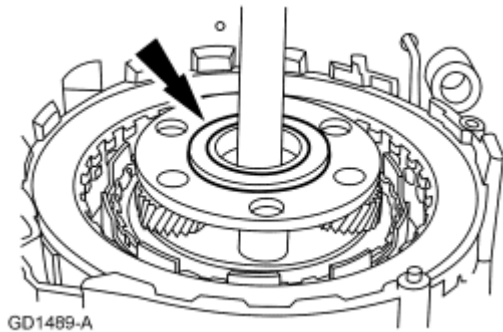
No. 6 Low/Intermediate Carrier Thrust Bearing
